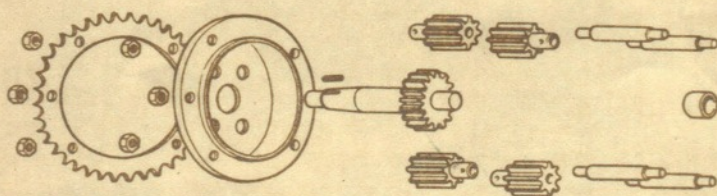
(below)—DRIVING SHAFTS, KING-PIN BLOCK AND WHEEL HUBS
